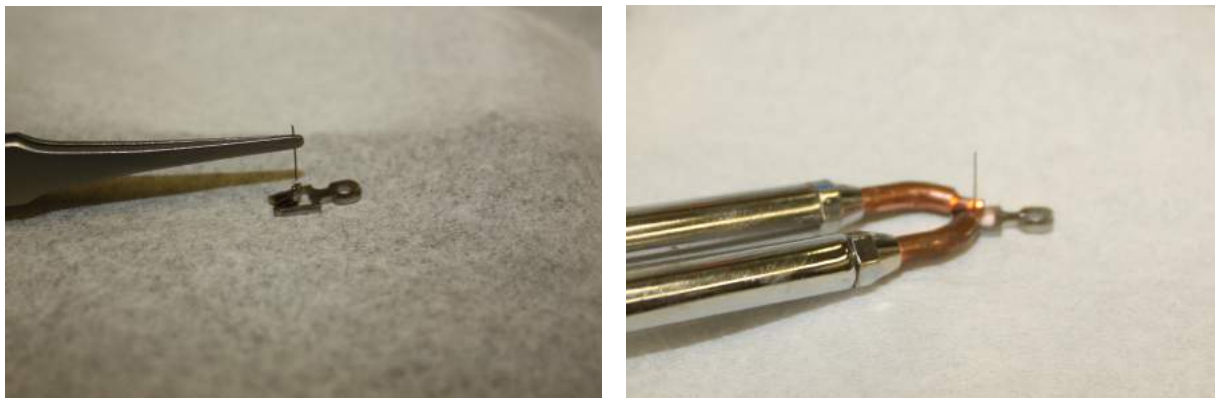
Resistance welding of tungsten tip in standard stm tip holder.
